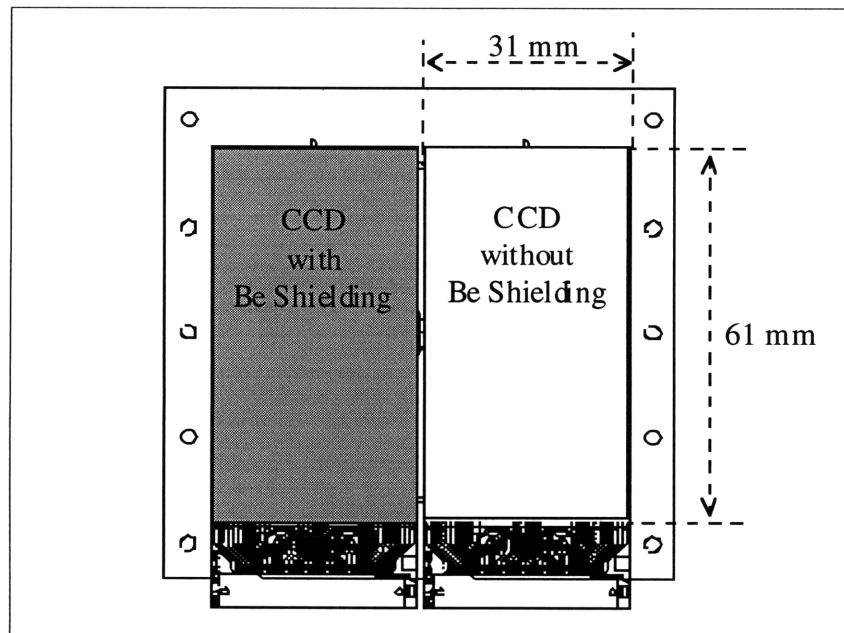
Dimensions of the CCID-20. (Drawing courtesy of Villasenor)
